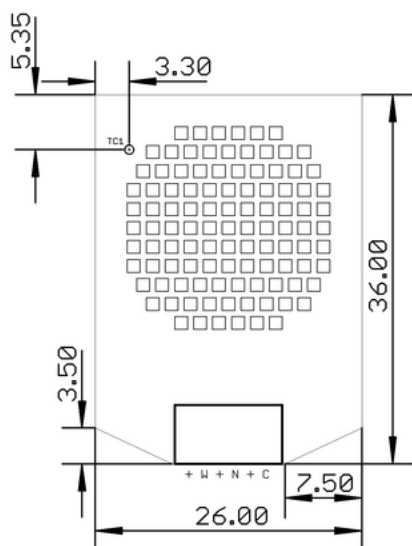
L3xxC-xyyyzz Mechanical Drawing
